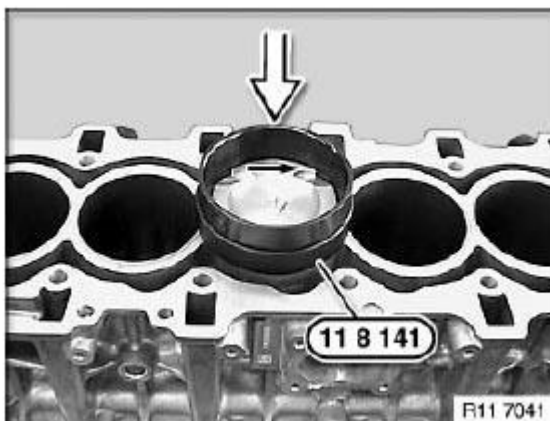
Pressing Piston Using Special Tool 11 8 141
